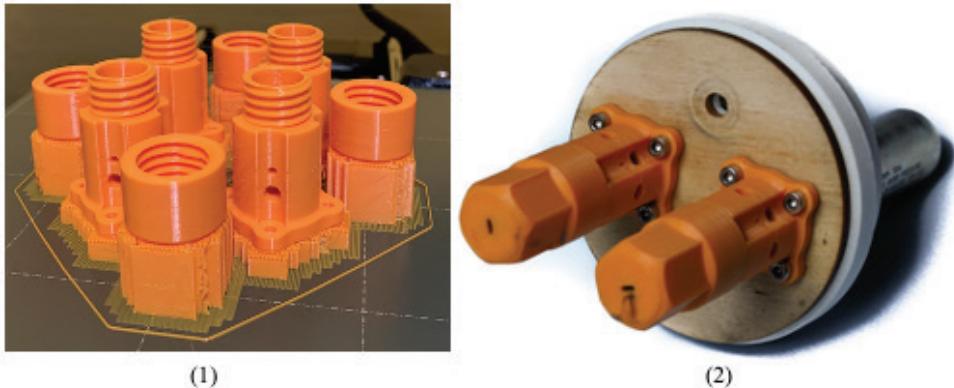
Additive manufacturing process of mechanism components: (1) – 3D-printed elements on the printer bed; (2) – assembled 3D-printed mechanism
